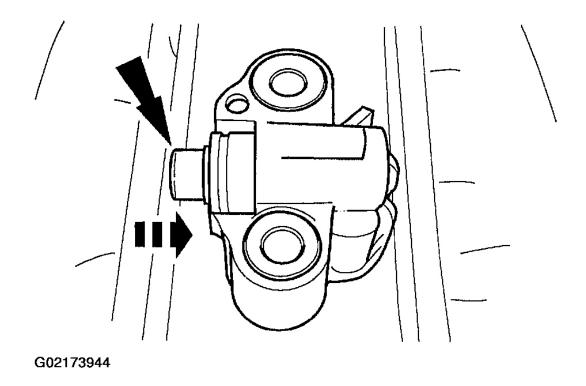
Compressing Tensioner Plunger Courtesy of FORD MOTOR CO.
